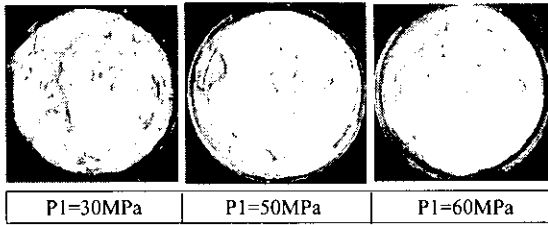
Fracture surface of IN738LC -ST304 welded specimens
